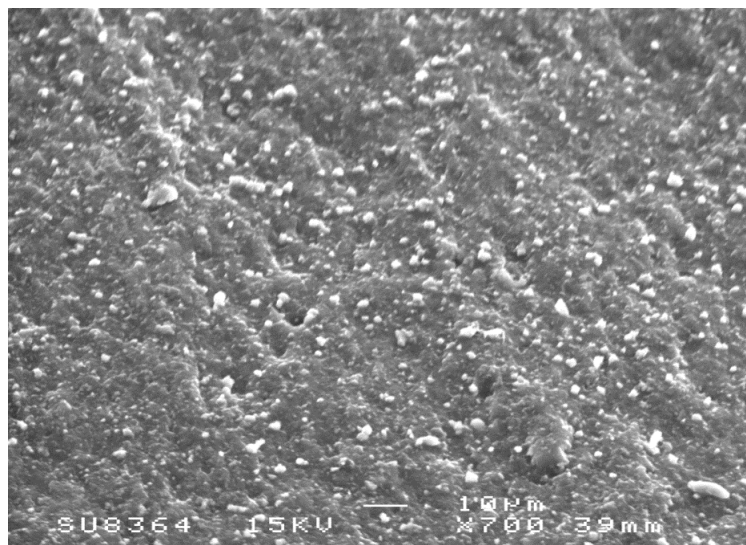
A Fracture surface of a spring seal with surface debris and pits.
